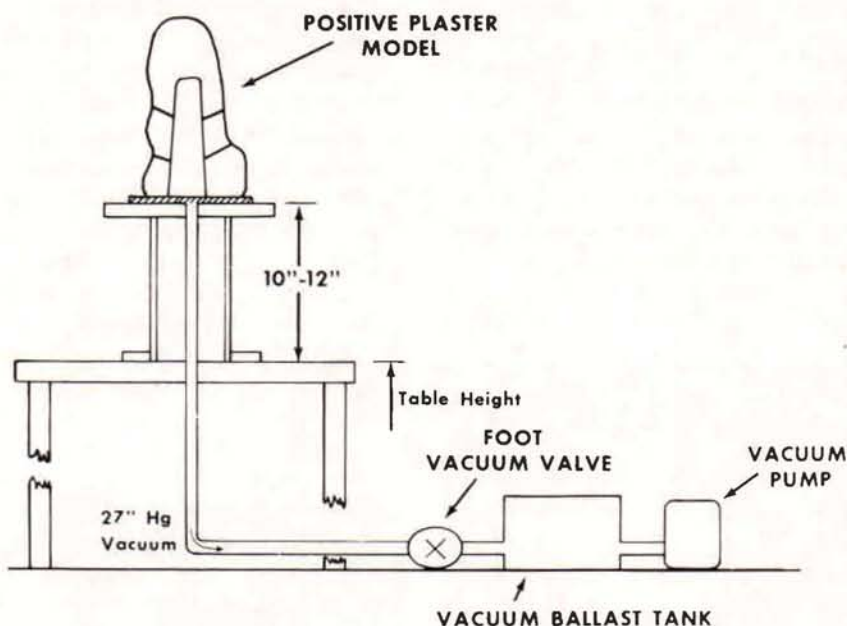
Schematic drawing of the vacuum forming apparatus. Polycarbonate on the positive stump model is not shown.
